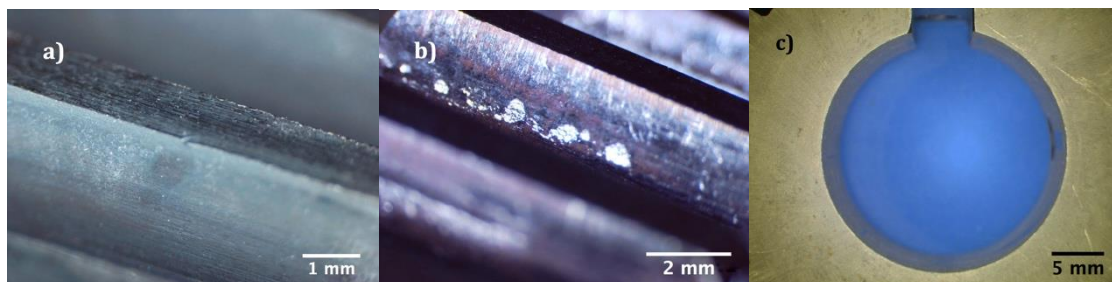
Images of the representative characteristics of the gears tested in the second round of the tests. (a) healthy gear. (b) gear with pitting. (c) gear with eccentricity.
